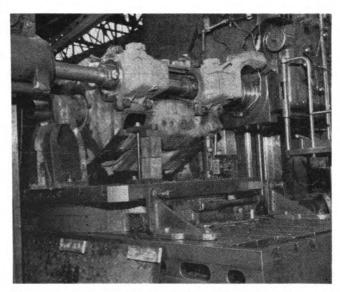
The final reconditioning operation is boring the axle support bearings.
